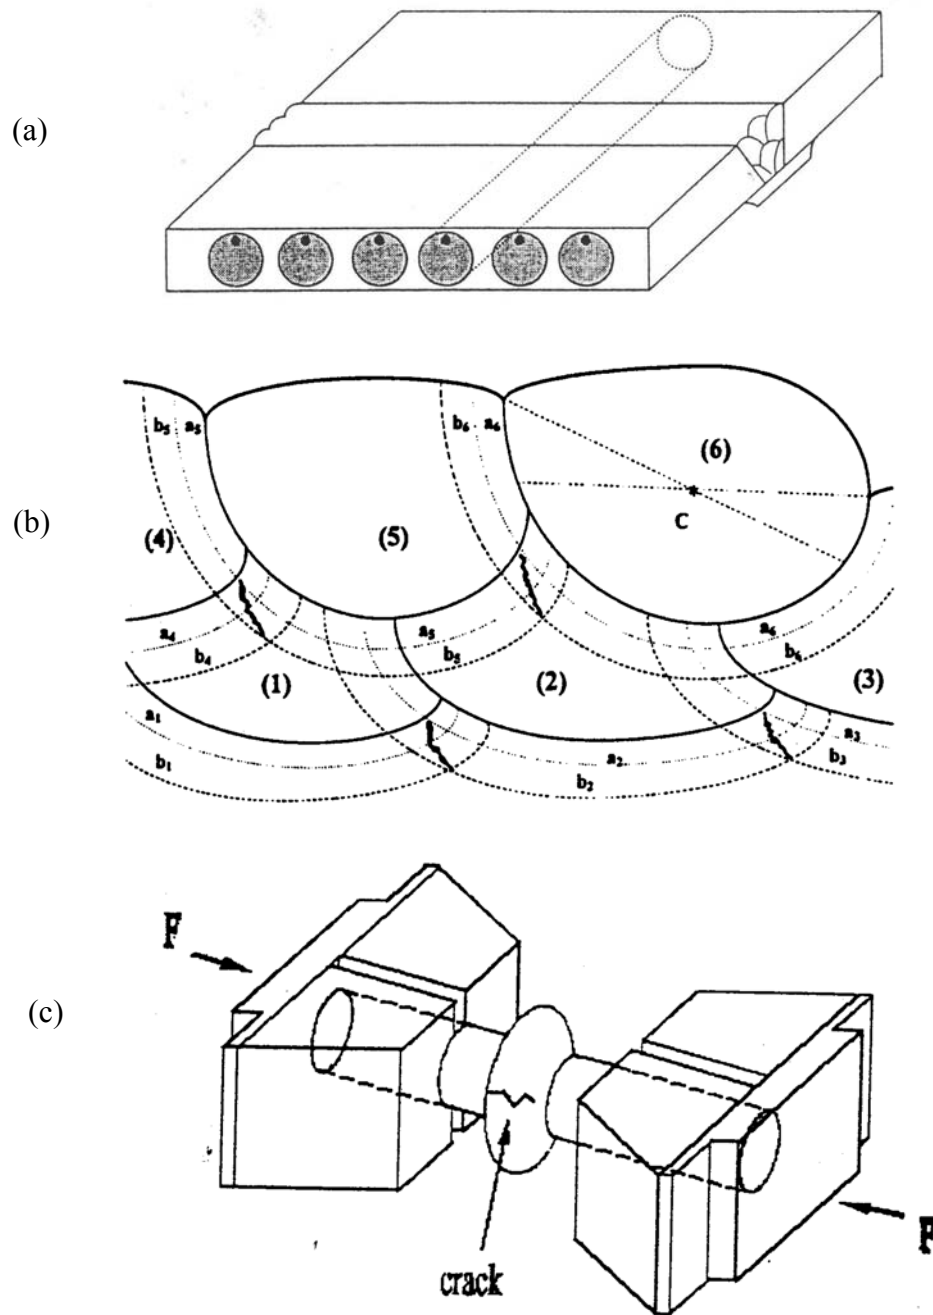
(a) Extraction of SICO testing specimens from a weld plate;
